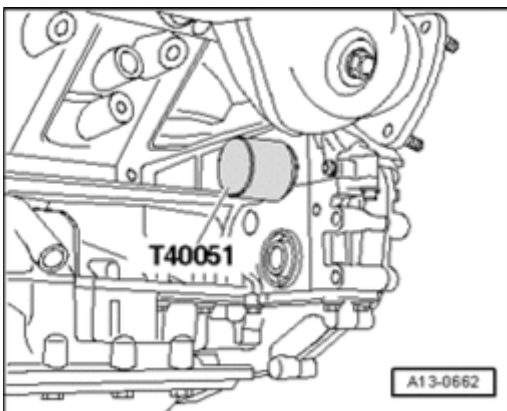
Driving In Sealing Ring For A/C Compressor Drive Using Thrust Piece T40051
